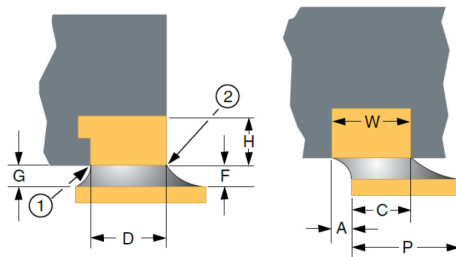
IPC-A-610G (H) = height of solderable surface of lead, if present. Some package configurations do not have a continuous solderable surface on the sides and do not require a toe (end) fillet.
